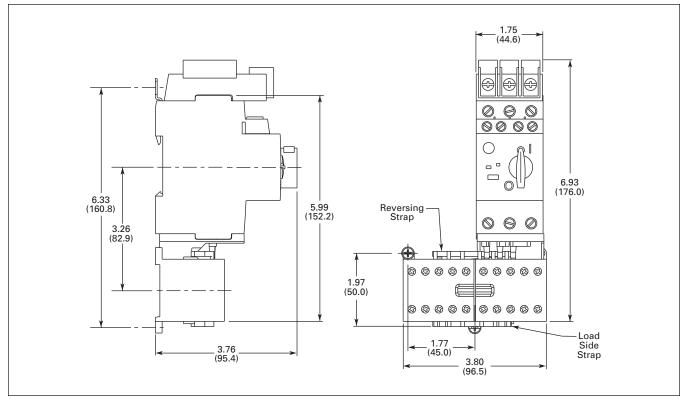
Reversing Combination Motor Controller AM357 (A307 MMP + C320WC25 WCL + CE52 Mini Contactor) — Approximate Dimensions in Inches (mm)
